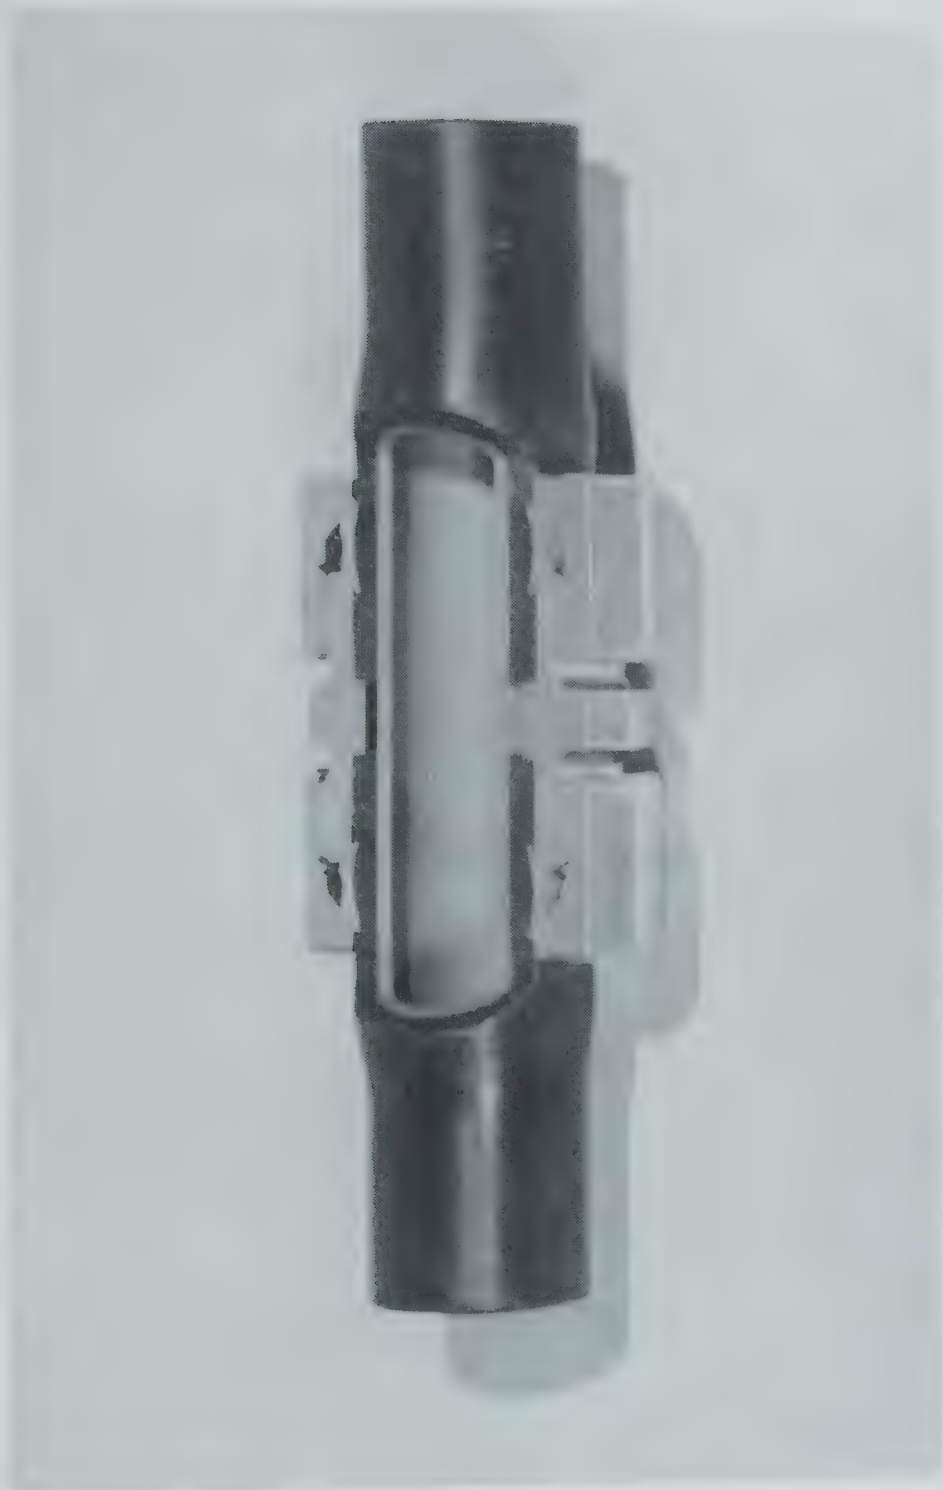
Compression sleeve joint; cut-away section of assembly
